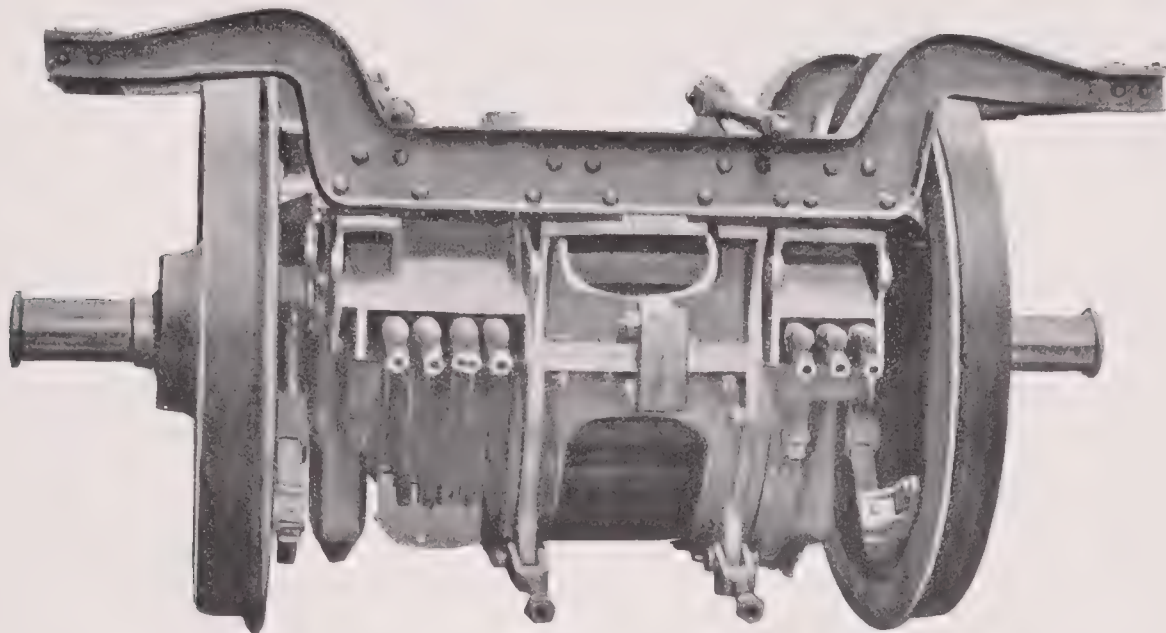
ASSEMBLED MOTOR OF A.E.G. HIGH SPEED ZOSSEN MOTOR CAR.
